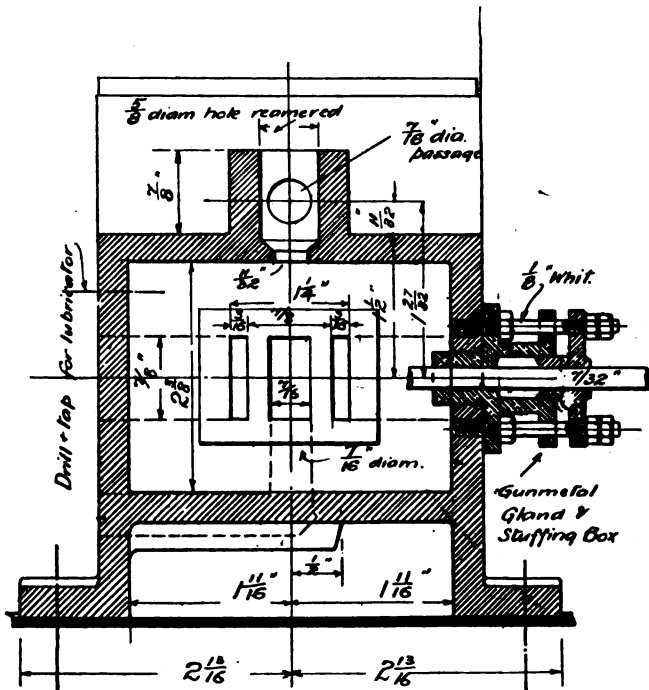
SECTION OF MODEL CYLINDER THROUGH VALVE SPINDLE AND THROTTLE VALVE CHAMBER. (Half full size.)
